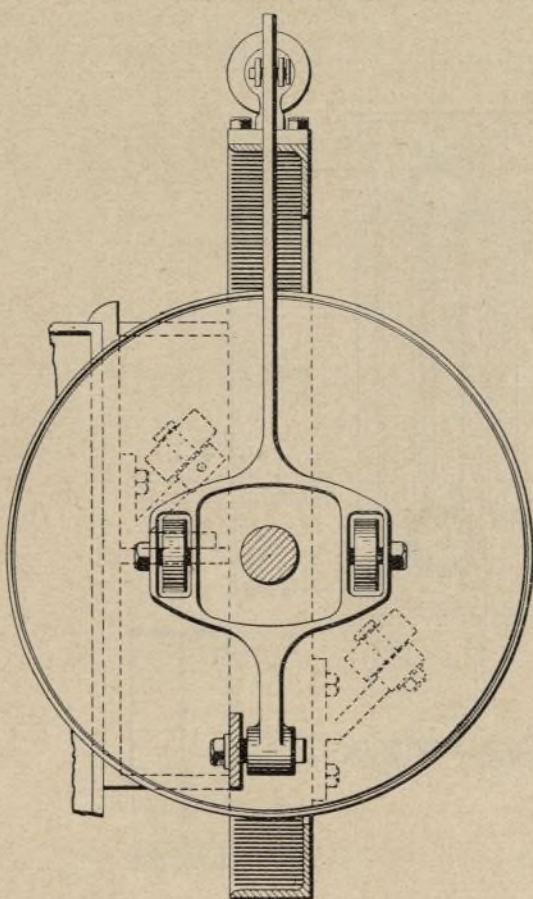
IMPROVEMENTS IN SIZING MACHINES.
